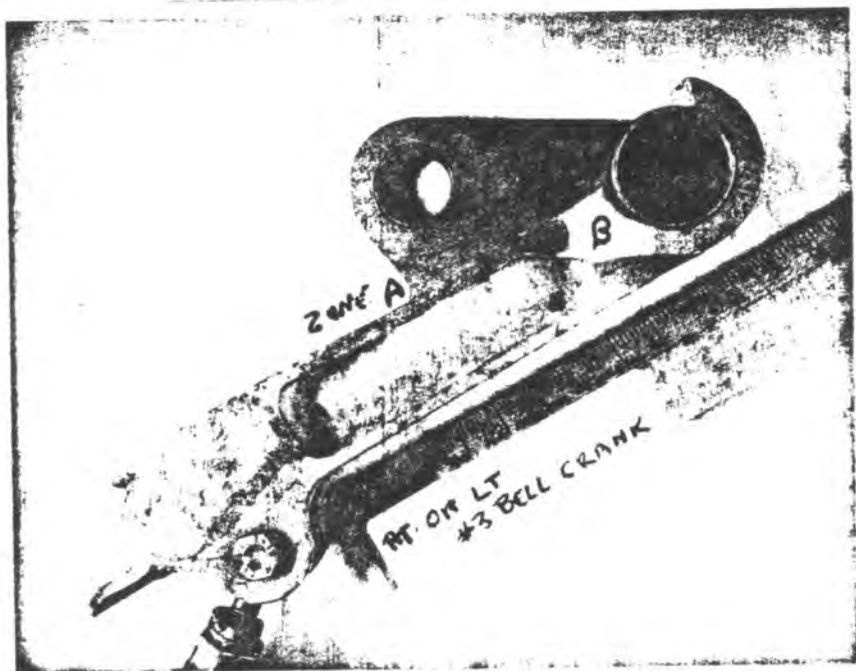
Separated Crack Surface on #3 Bellcrank. 5/8X
